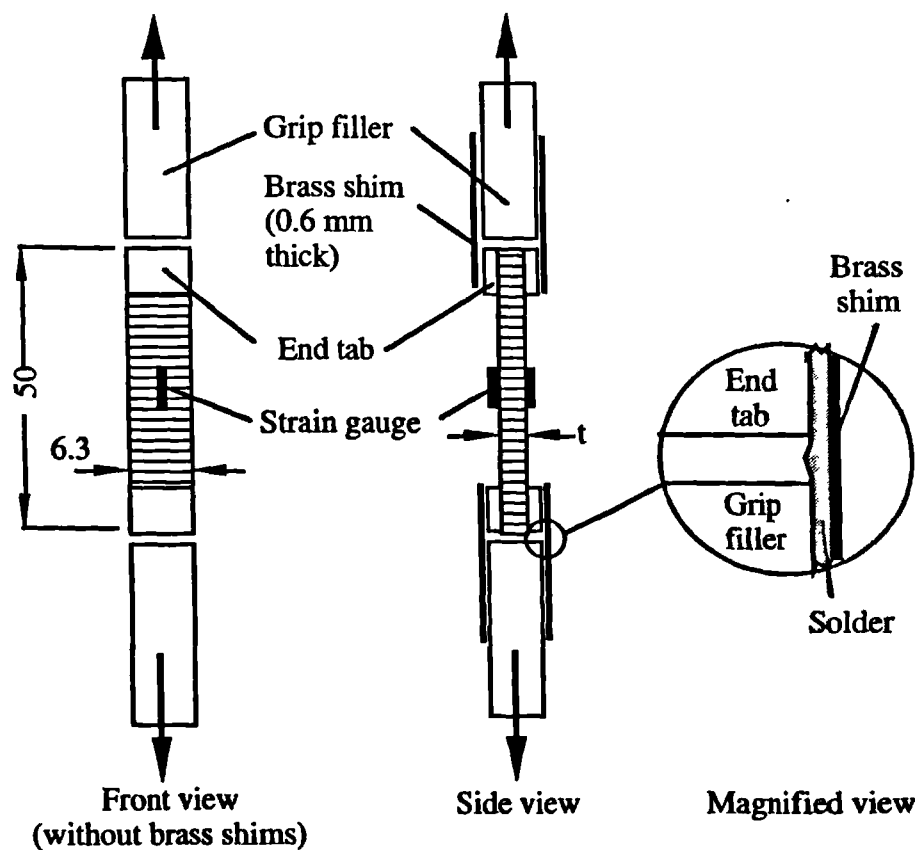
Tabbed hinged block specimen (Roy and Kim [1994]), dimensions in mm
